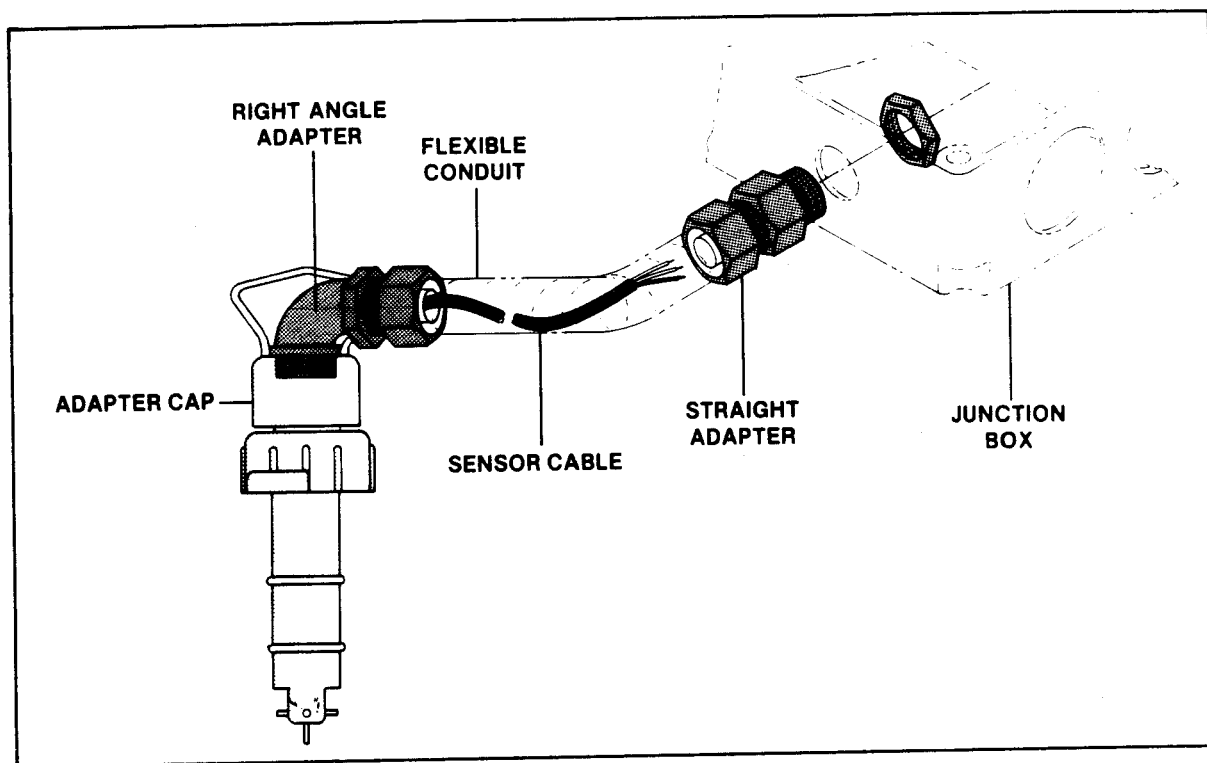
Detailed drawing of the MK 515.89 Sensor Conduit Kit.
